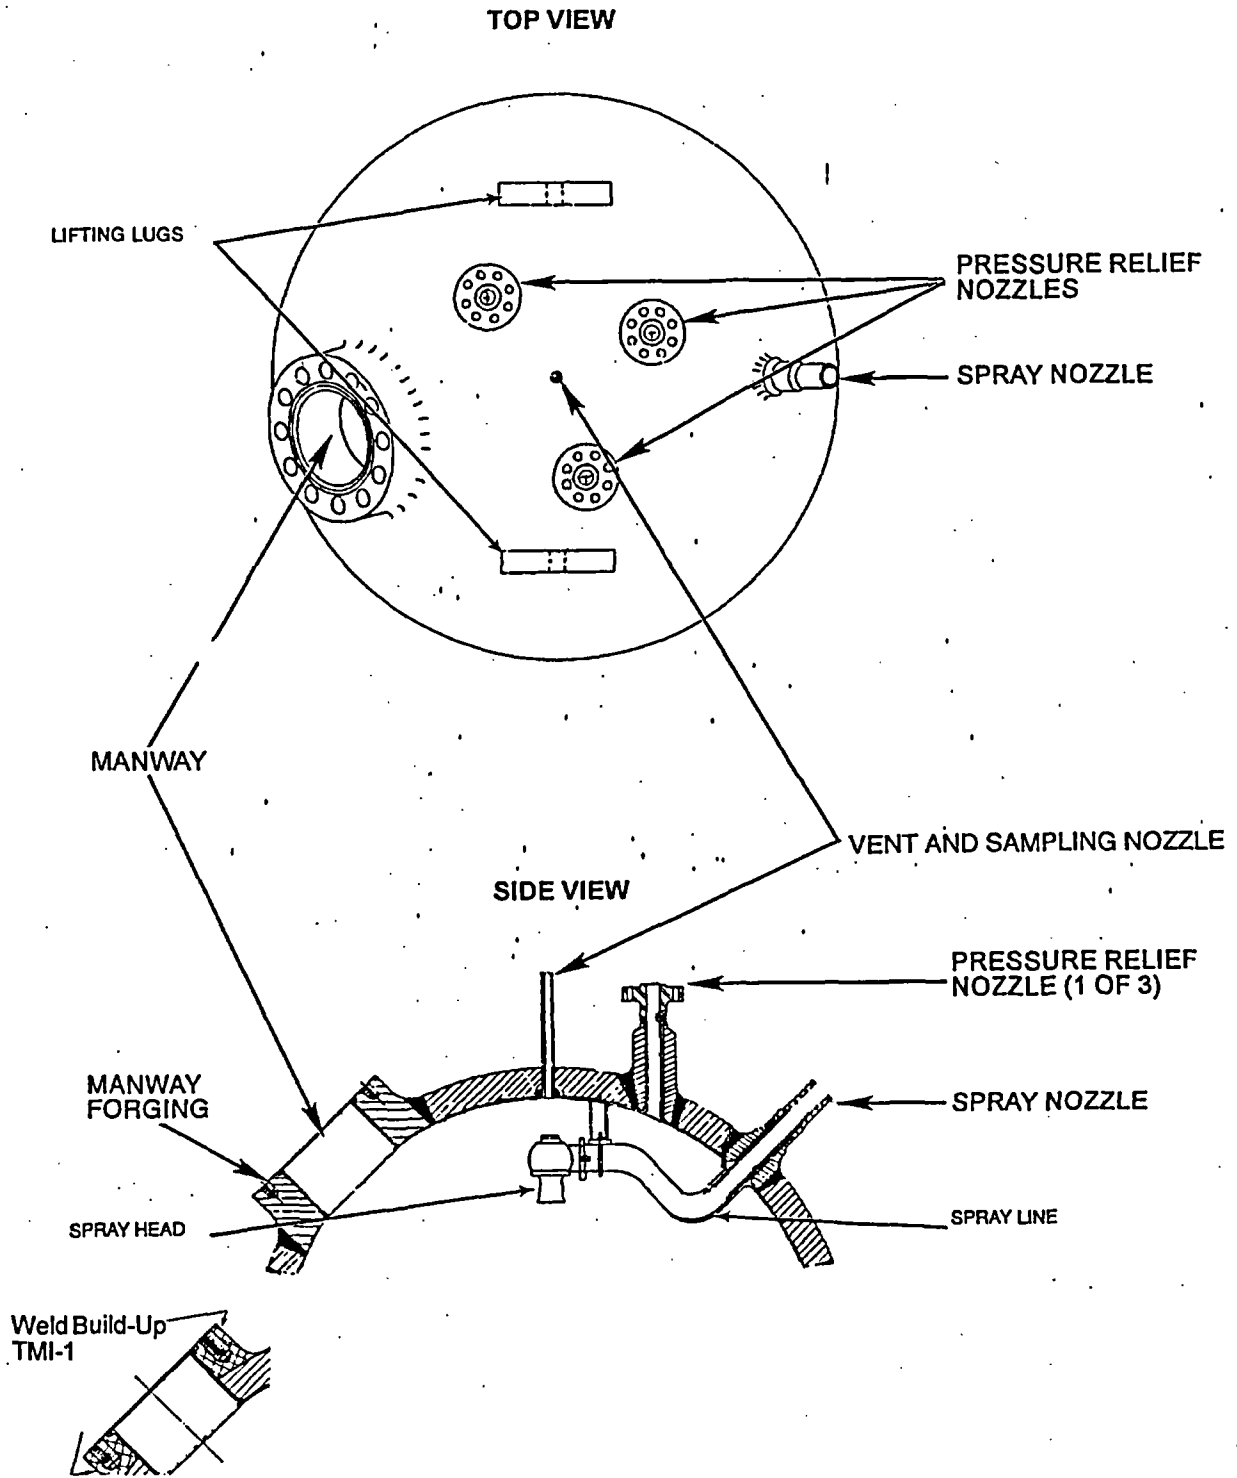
A - Penetrations at the upper head of pressurizer vessel. Note, the manway boss was weld buildup at TMI-1, instead of a forging.
